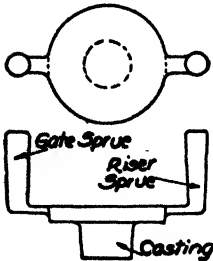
The Completed Casting As It Is Shaken Out from the mold.
